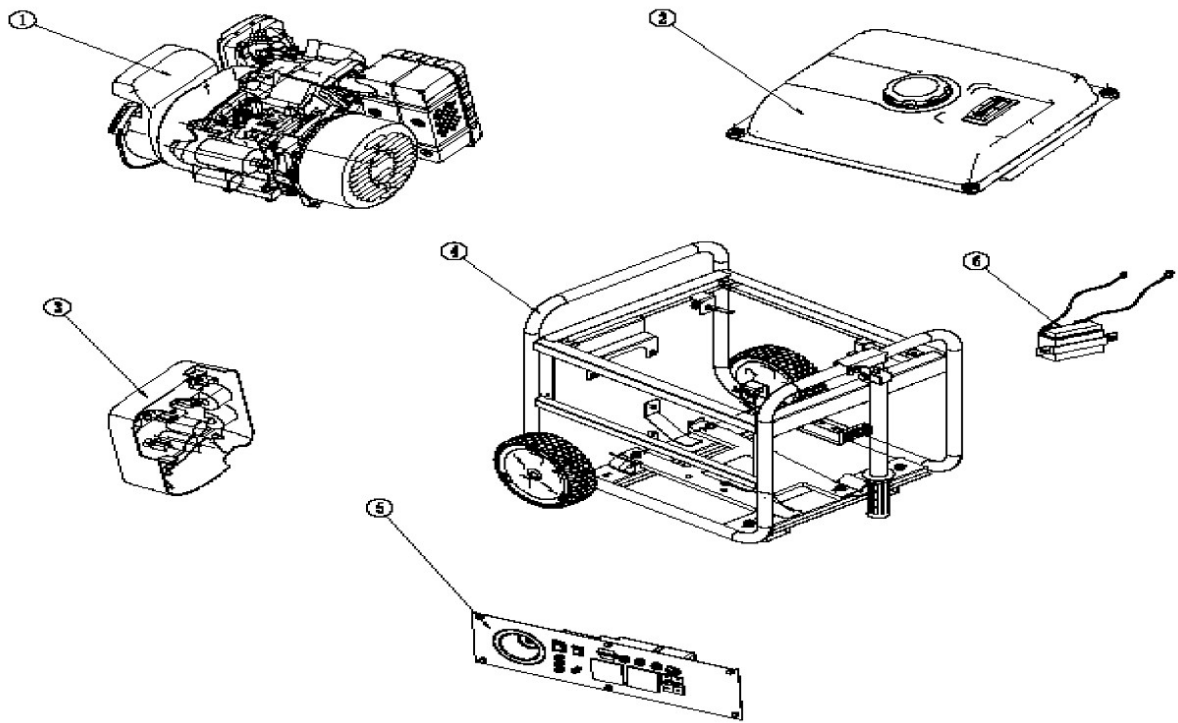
Spare parts drawing 1 PG-I 42 SE
